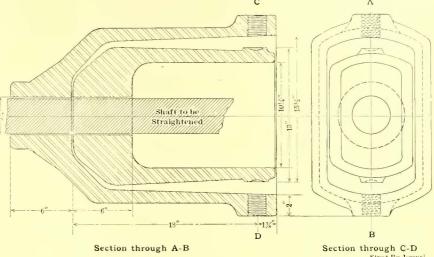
SECTION OF SHAFT STRAIGHTENER
